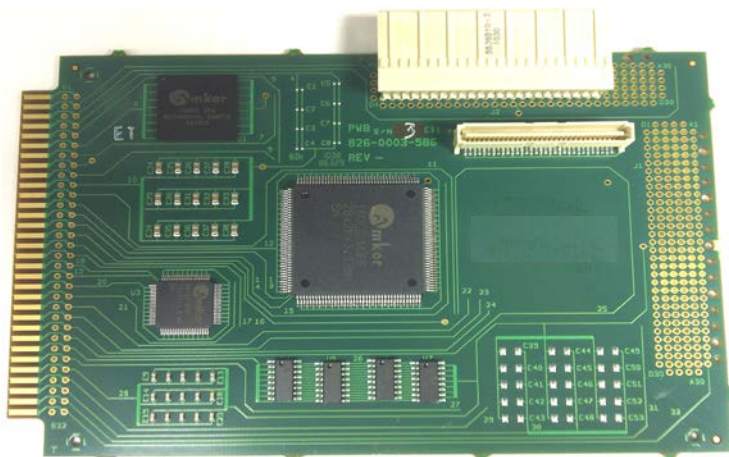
IPC B-52 Board Design Used for SIR and Cleanliness Tests
